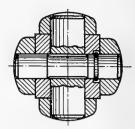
Universal joint, the smaller pin being retained by wire snap ring.
